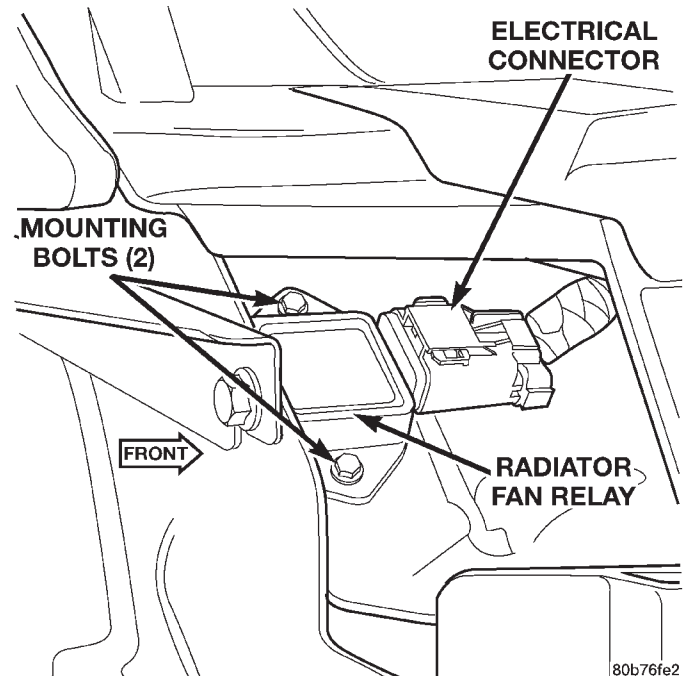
Radiator Cooling Fan Relay Removal/Installation
